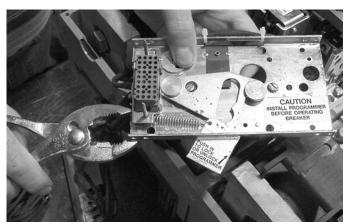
Bending the locking tabs to remove the large plug from the trip unit mounting plate.
